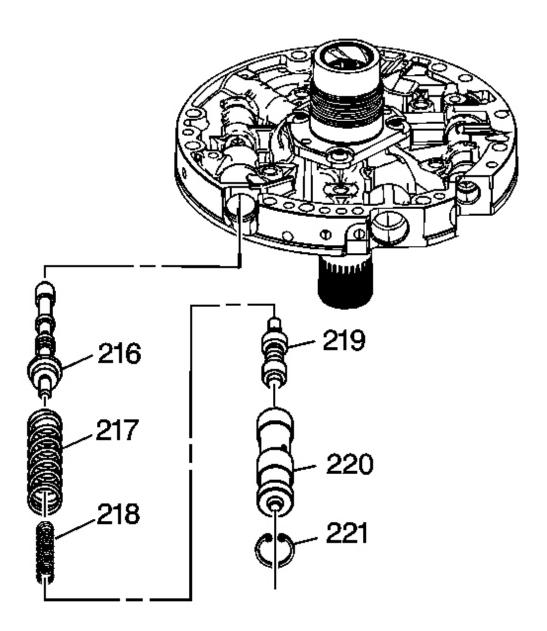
View Of Oil Pump Cover & Components Courtesy of GENERAL MOTORS CORP.
